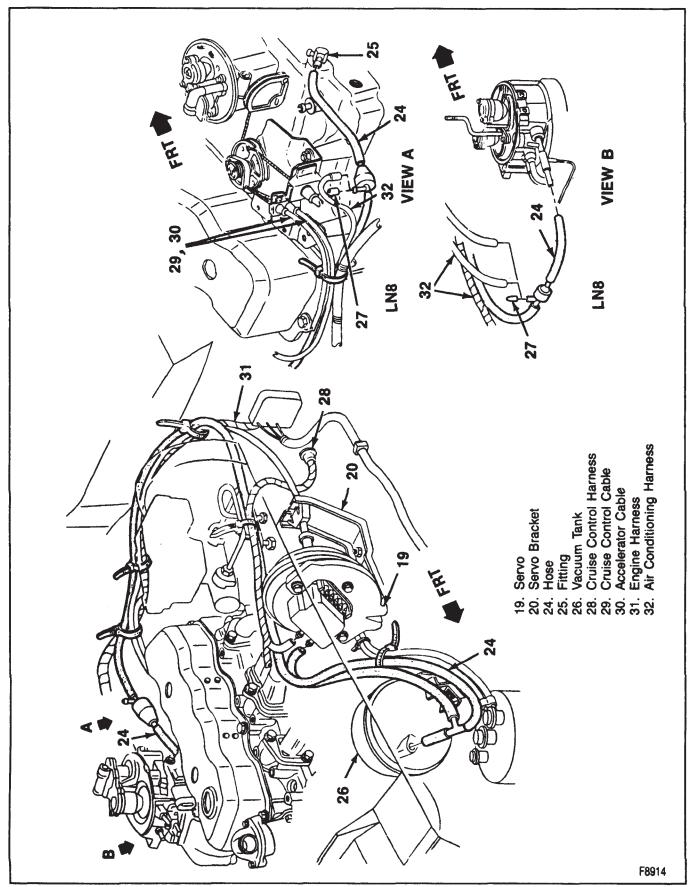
Servo Wiring Harness and Cable Routing—2.5L (VIN A) Engines
